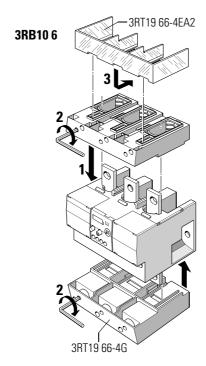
The panel mounting of the 3RB10 electronic overload relay (S10/S12)
